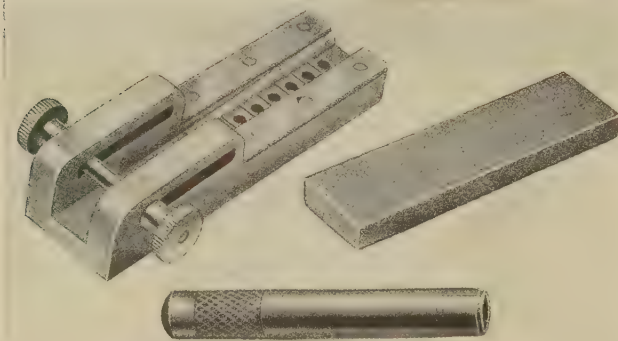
A Useful Contact Arm and Contact-truing Jig.
